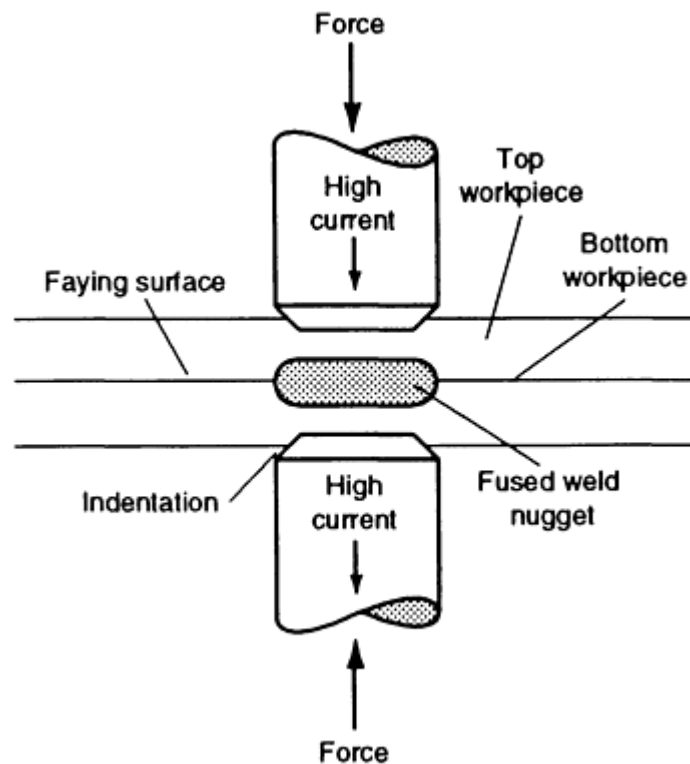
RESISTANCE SPOT WELDING PROCESS
